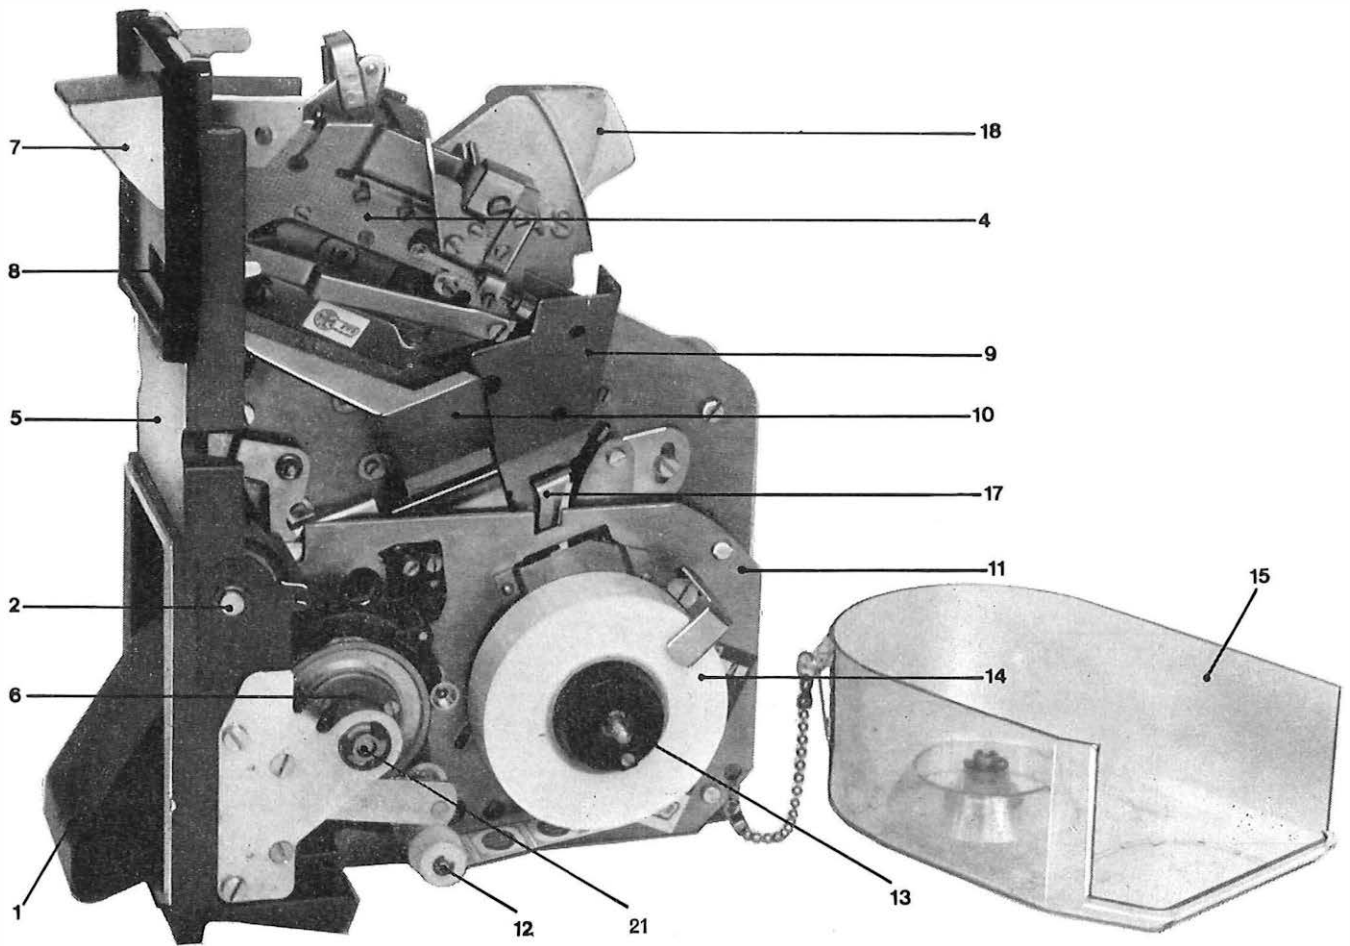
The Stamp-Selling Machine Type G, right-hand view
